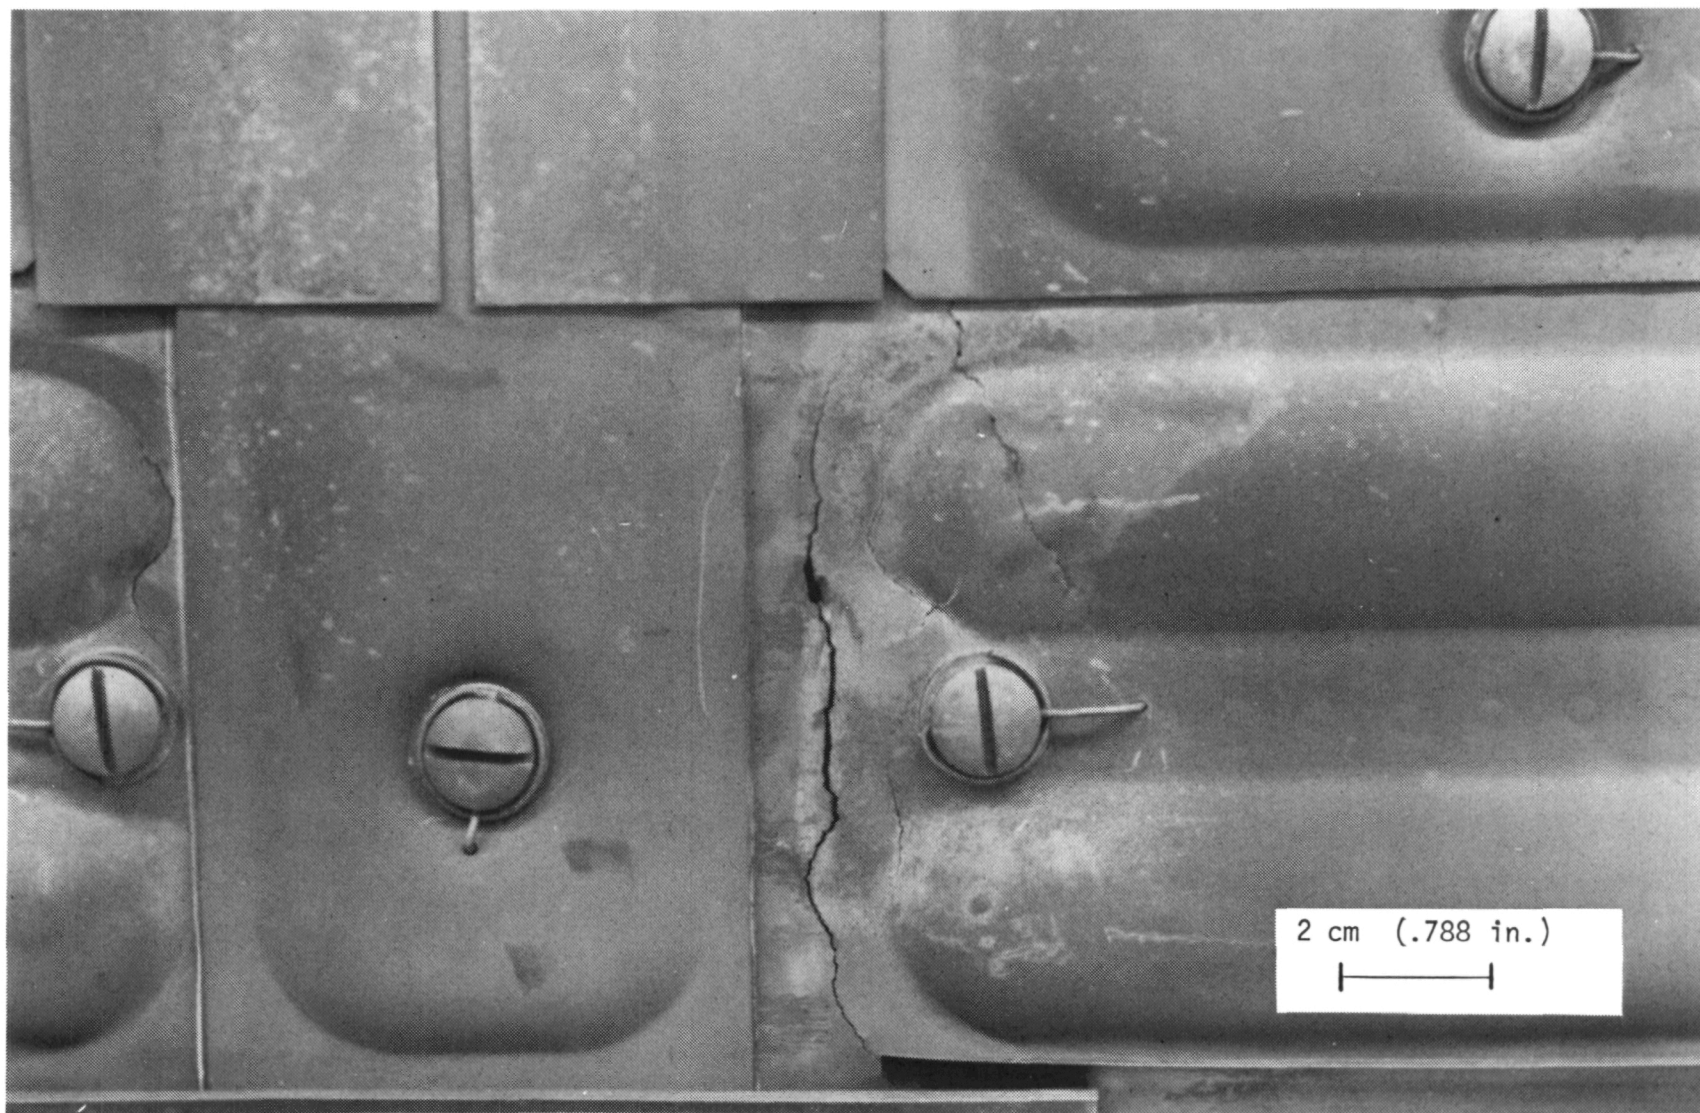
Damage in Panel 6 After Twenty-fifth Test Cycle (Area 3)
